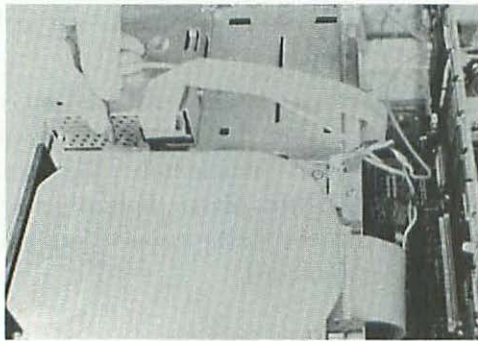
Position the thermostat wire between the disk drive and the hard drive.
